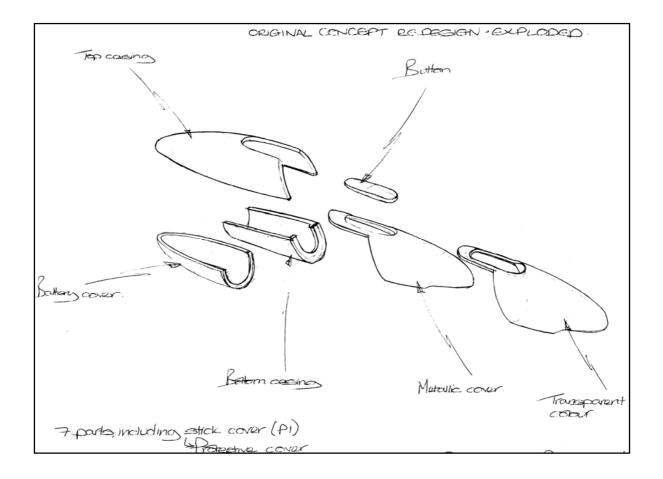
Exploded Sketch of Cold Core Treatment Wand
